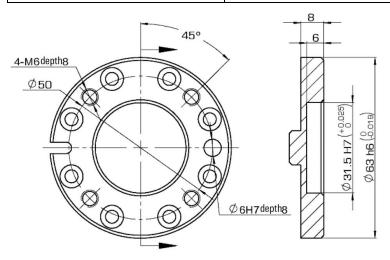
The flange dimension diagram of wrist of AIR8-710B manipulator
